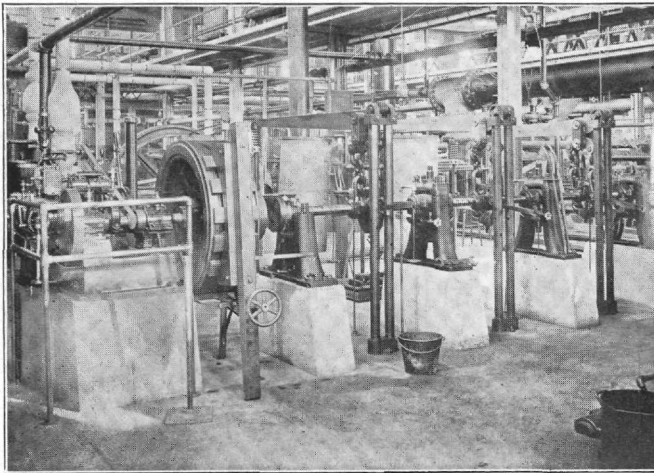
Bearing Testing Machine and Uniflow Steam Engine
